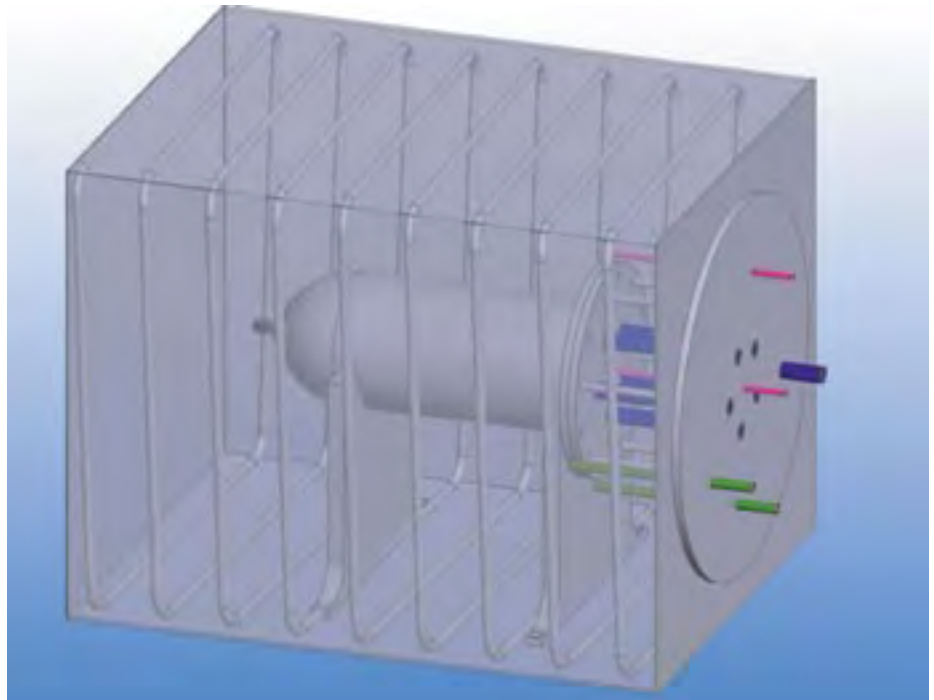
Drawing of the measurement chamber of the PTU calibration system.
